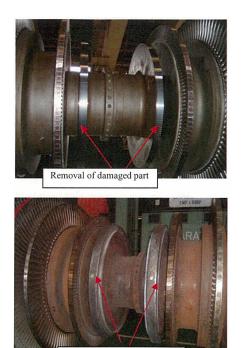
Weld Repair of Damaged Part of Turbine Rotor for Geothermal Power Plant in Philippine.
